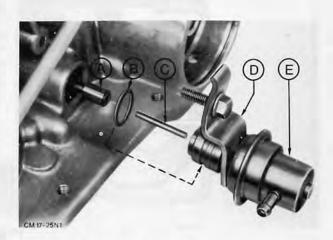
Fit vacuum diaphragm A - Throttle valve B - O-ring C-Actuating pin
